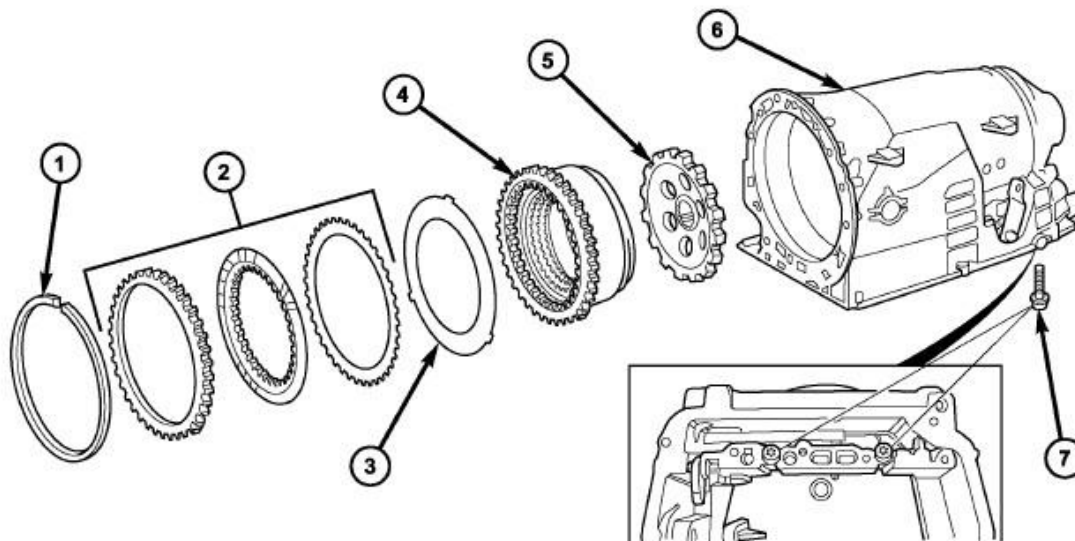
Remove/Install Holding Clutch B1 and Oil Pump
